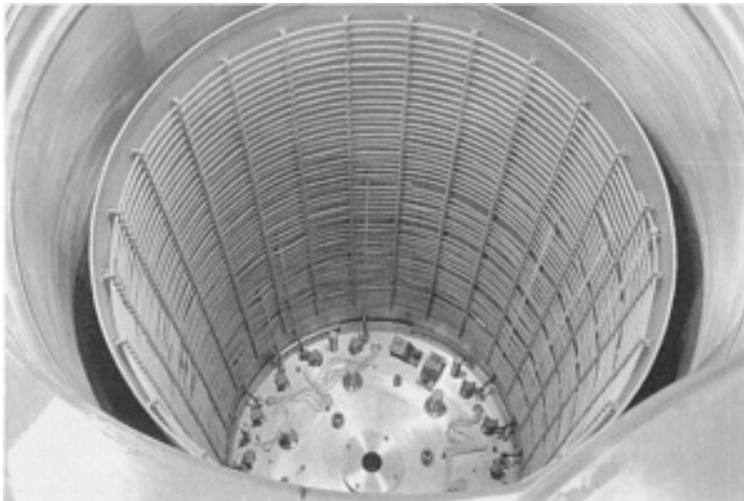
Large molybdenum HIP furnace. This 1.5 m (60 in.) diam heater consists of stranded molybdenum wire on a molybdenum shell. Courtesy of Bodycote IMT, Inc.
